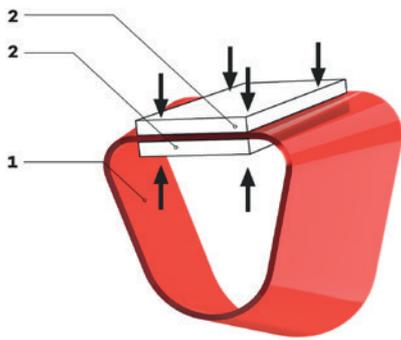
Pre-forming of a hollow cone, PLEXIGLAS® GS (1), clamping blocks (2).
